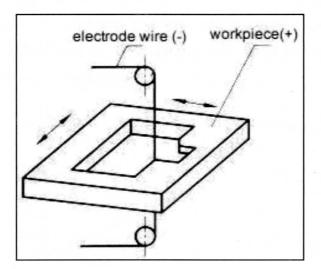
Polarity of electrode wire and work piece Source: Thomasnet.com, Wire Cut EDM (Electrical Discharge Machining)
